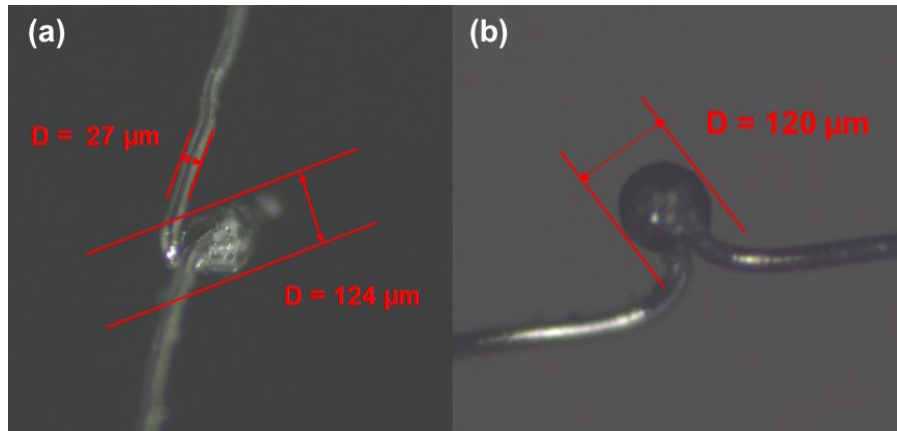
Microscope images of B type thermocouples bead welded by (a) an oxy-acetylene torch and (b) an arc welder.
